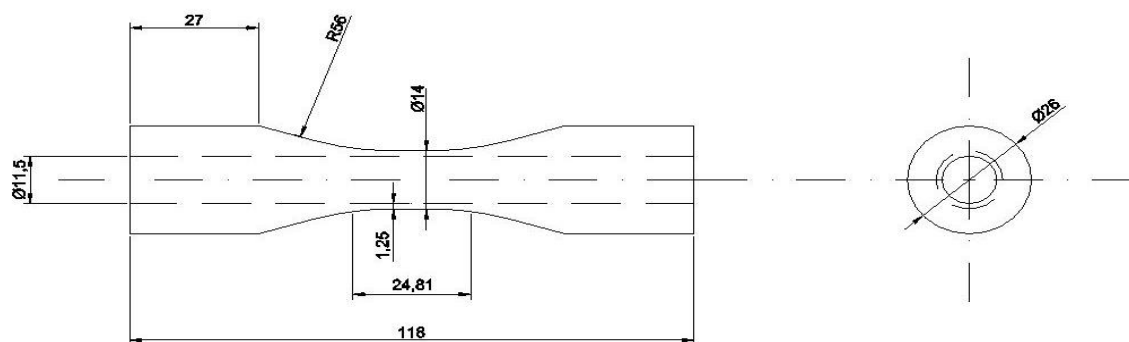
Geometry of the steel test specimens used in the experiments. Dimensions in mm.
